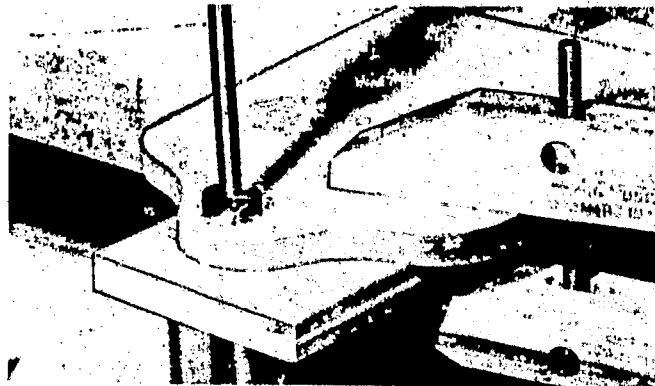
Smoothing the bottom of a hole with forstner bit.
